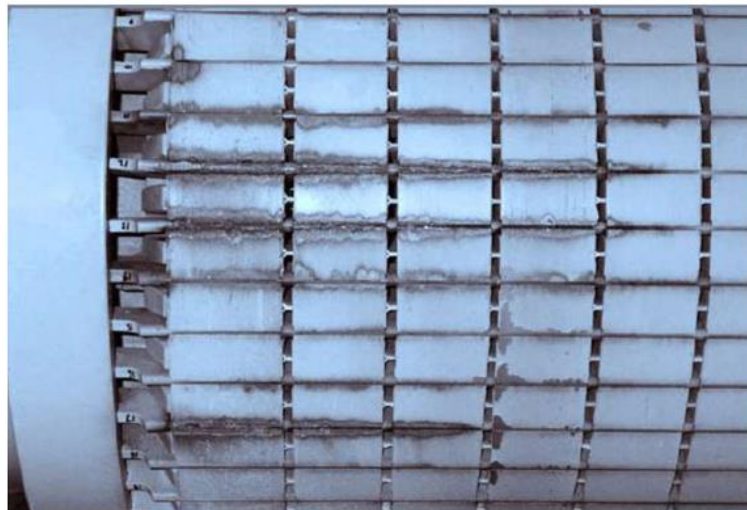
Damage to the rotor structure of the General Electric turbine generator
